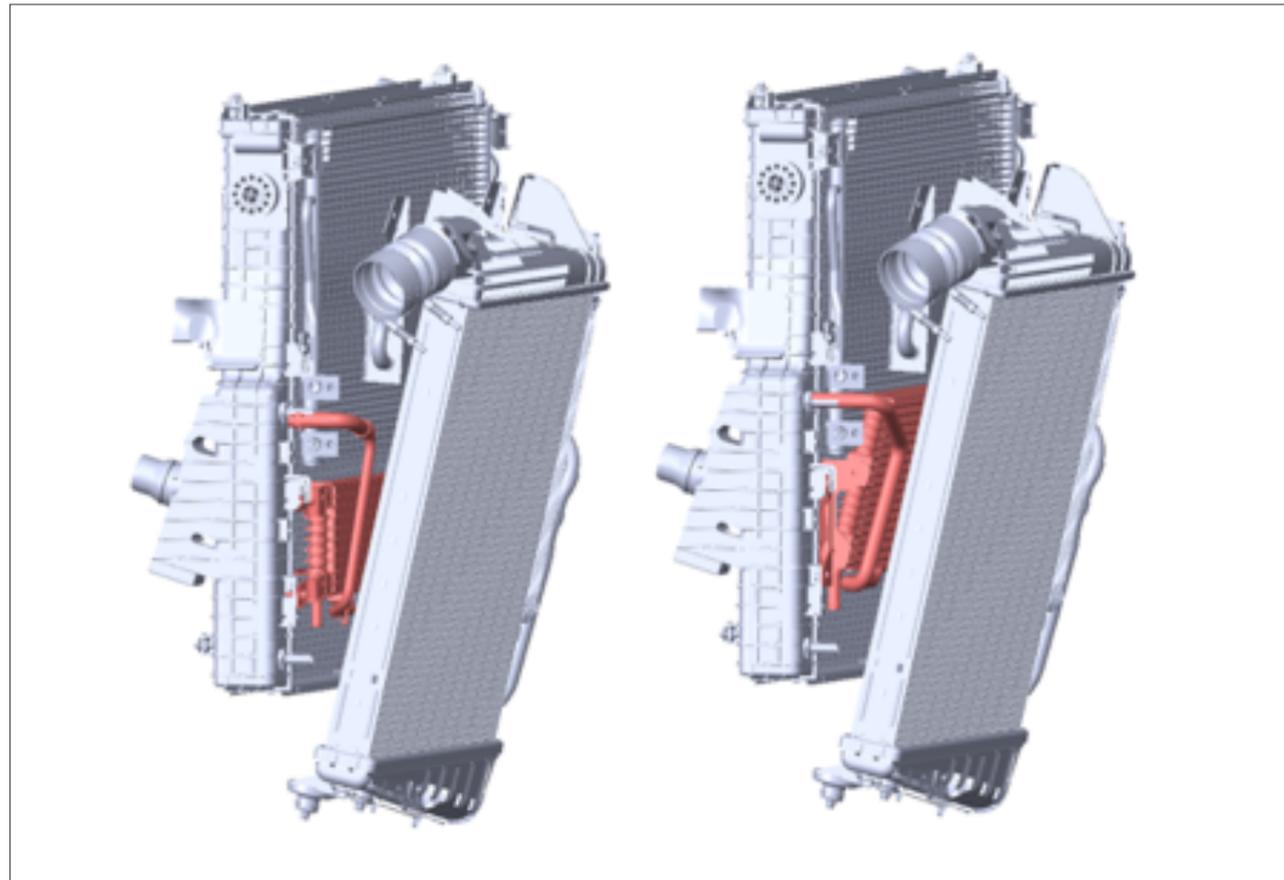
Stock transmission cooler mounting position (left) and Mishimoto transmission cooler mounting position (right).
